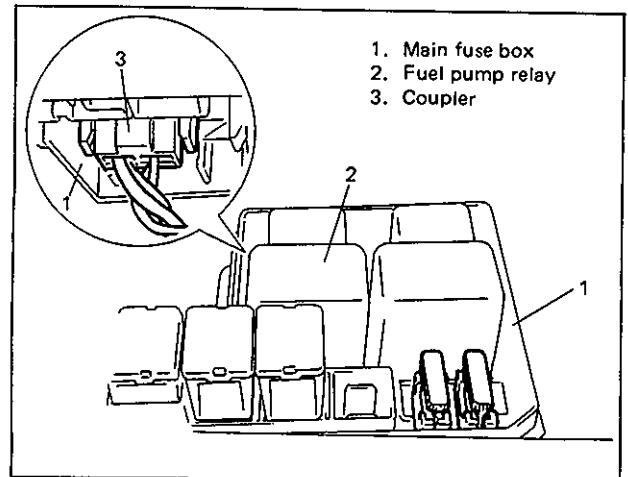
Disconnecting Fuel Pump Relay Coupler
